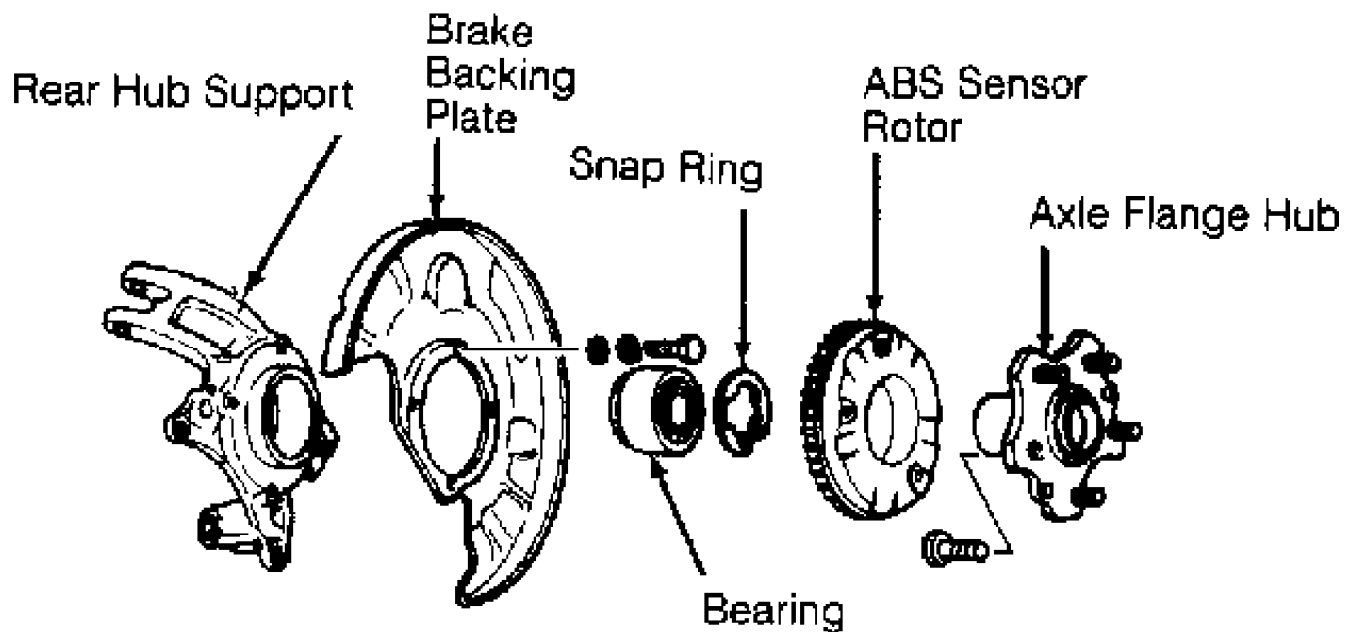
Exploded View of Rear Hub Assembly (RX7)
